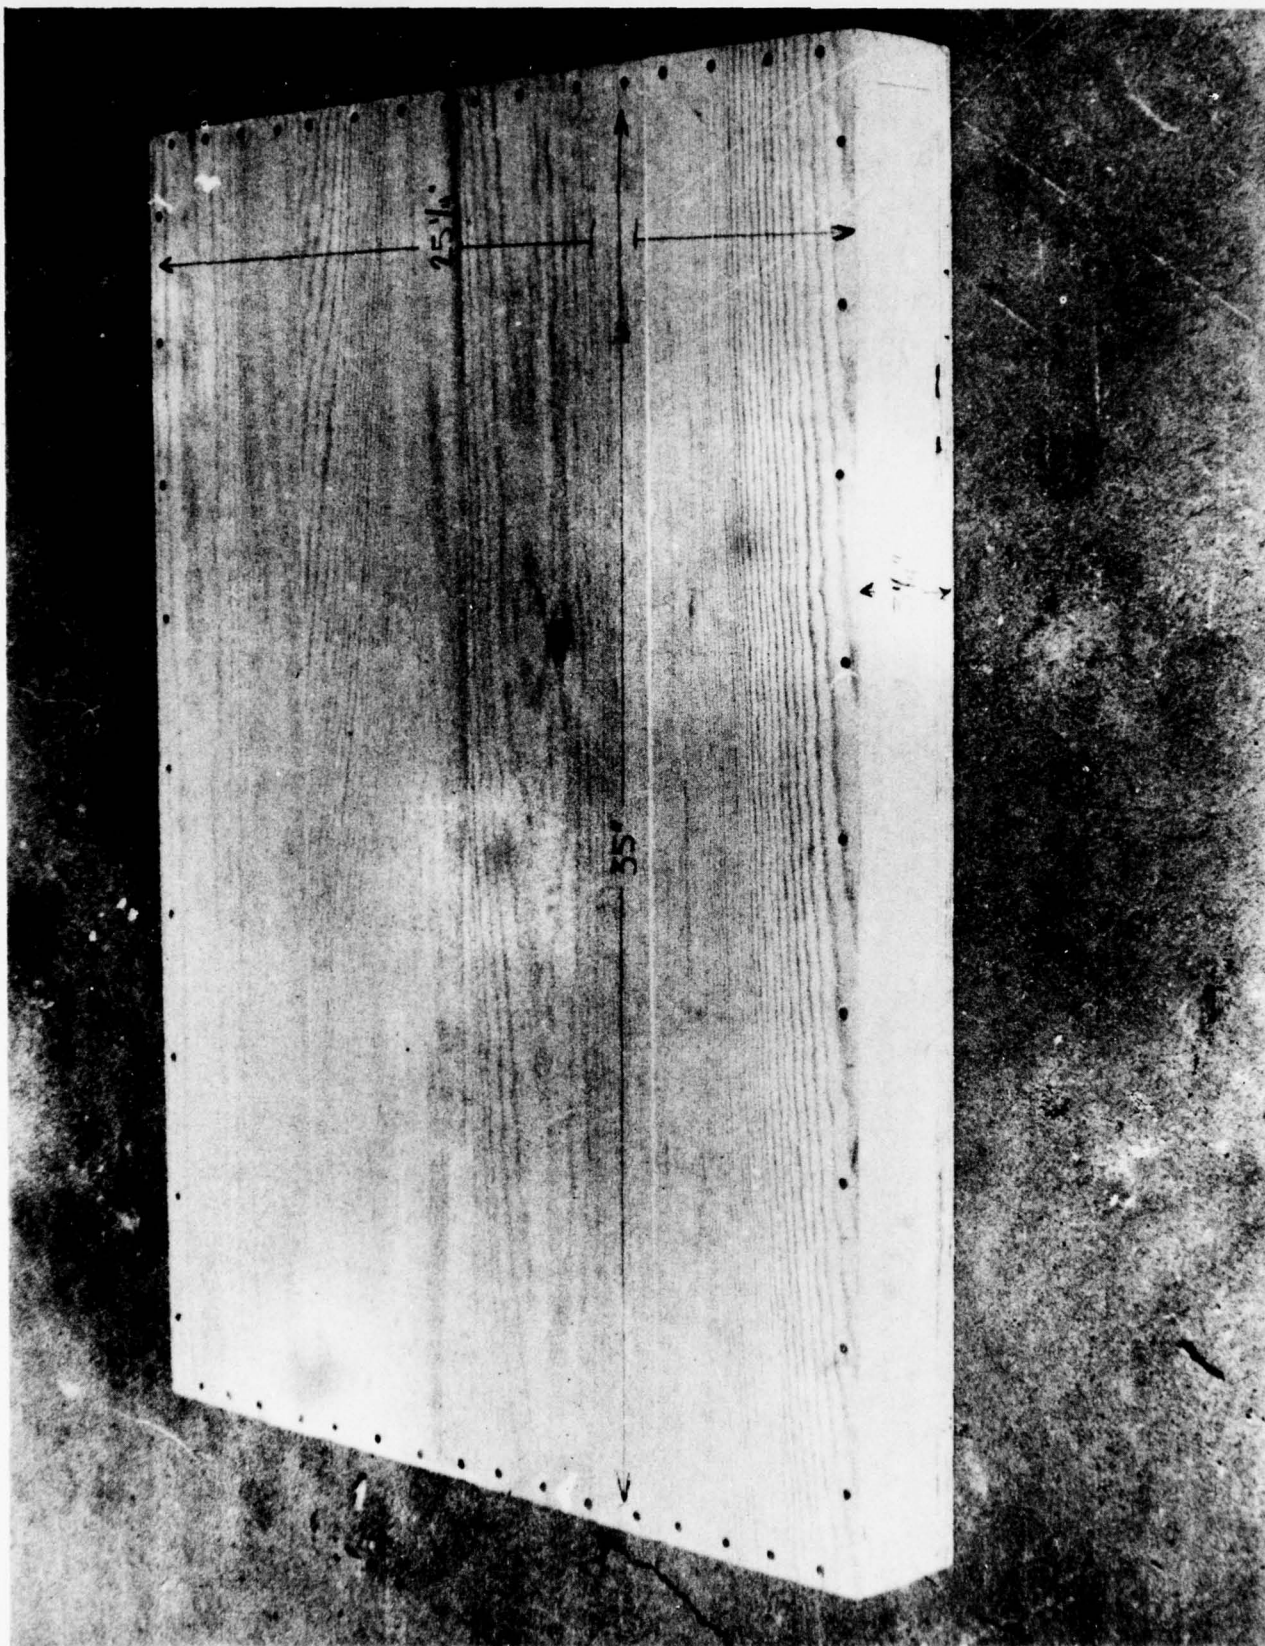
ARMY 155 mm UNIT LOAD TOP ADAPTER DETAIL
